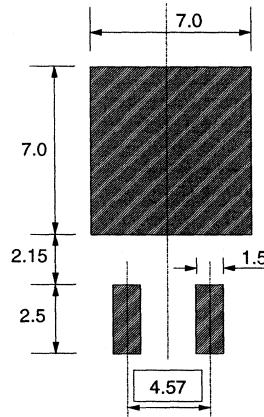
SOT428 : minimum pad sizes for surface mounting.
